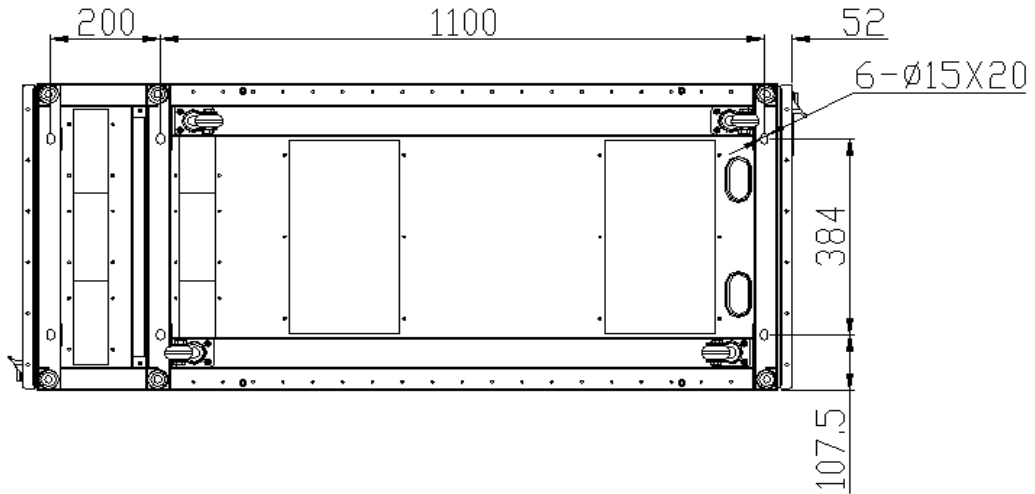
Dimension of 1400mm cabinet of MC1000/2000, in mm)
